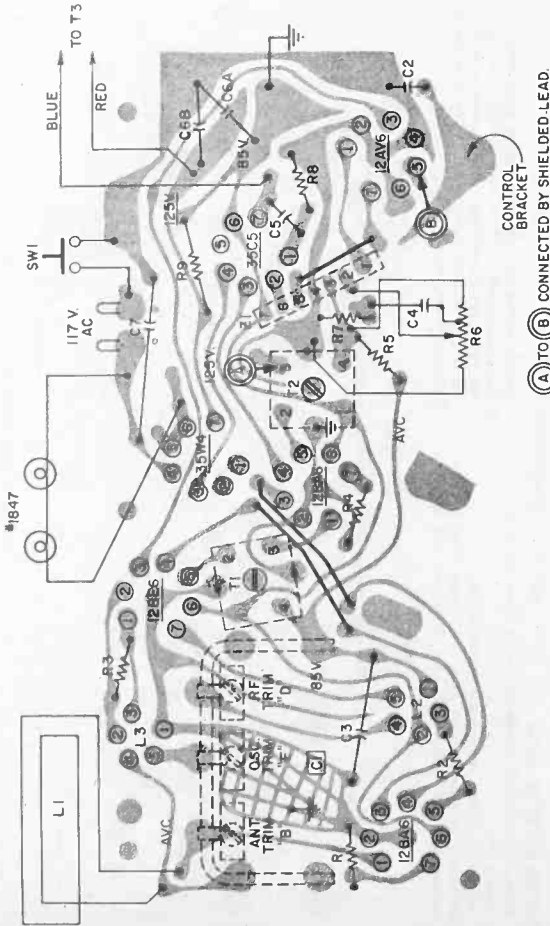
BOTTOM VIEW OF CHASSIS
